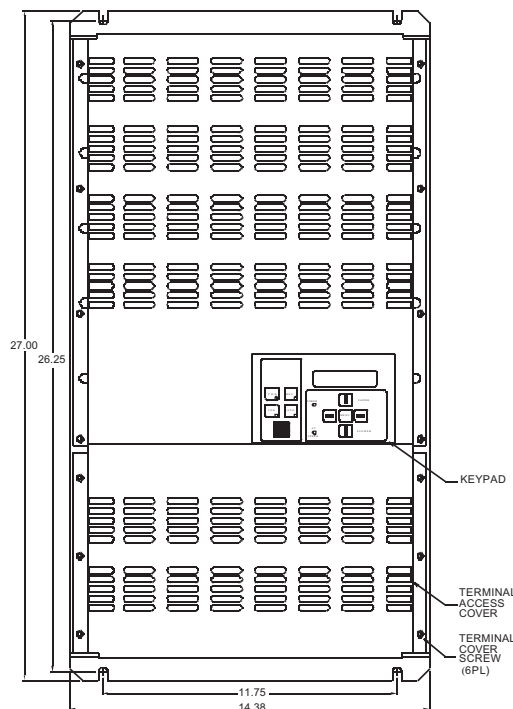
ADX CONTROLLER MOUNTING DIMENSIONS, 40 - 75HP, 460V
